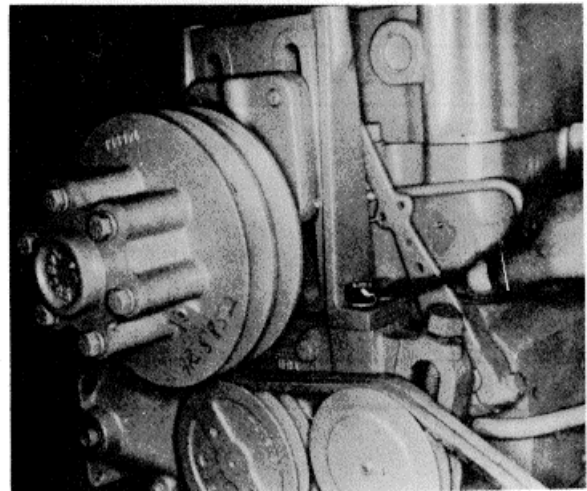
, (N100120). Removing fan hub assembly (FFC Series)
